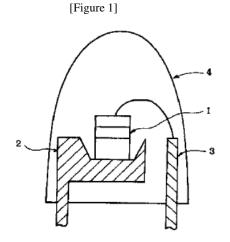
Schematic cross-section drawing that shows a traditional LED structure
